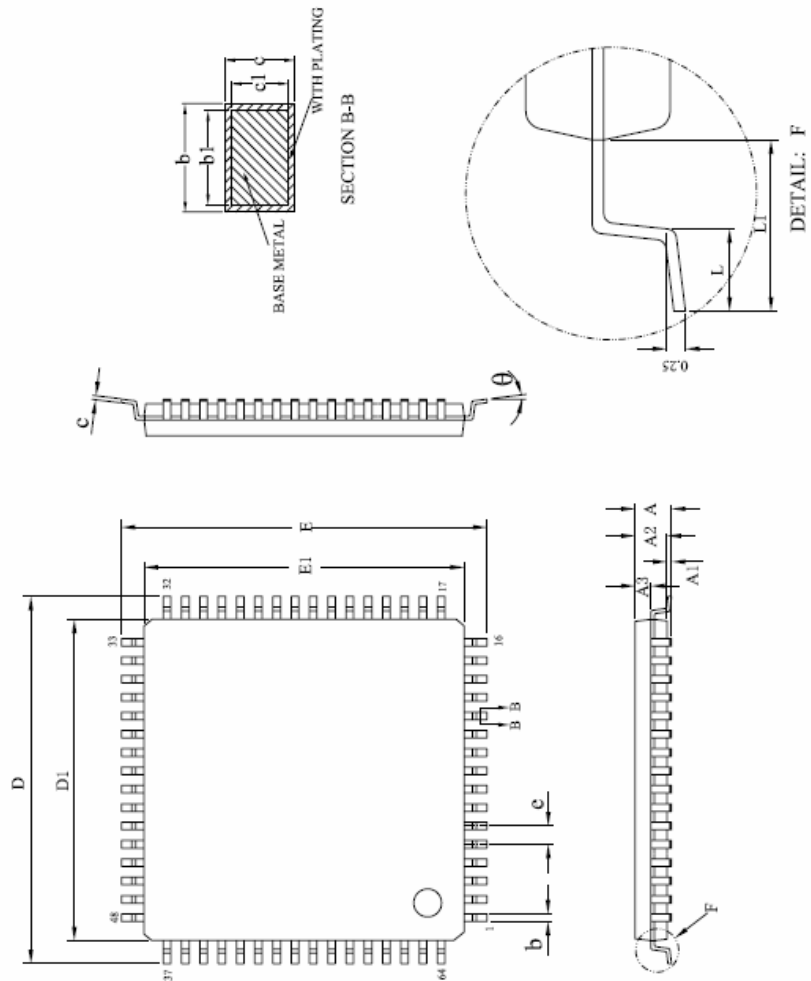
LQFP64-10x10mm Package Dimension Parameter
